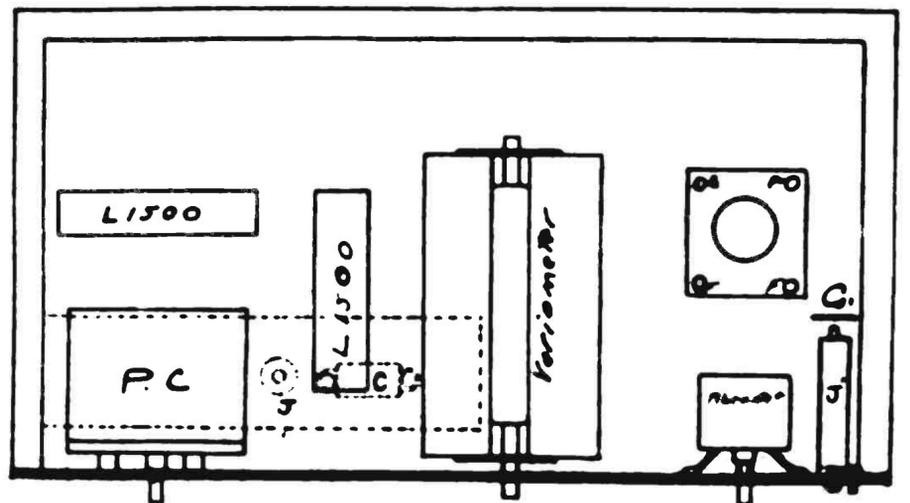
Top view, showing the method of mounting all the instruments. Note the fact that the two honeycomb coils are mounted at right angles.
